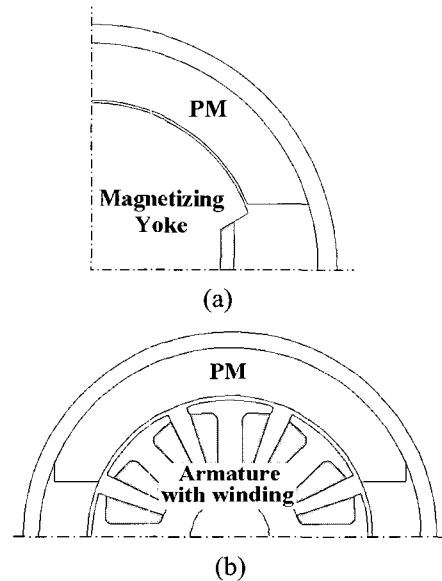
A 2-pole PM DC motor and its magnetizing fixture: (a) Magnetizing fixtures, (b) Motor with winding.
